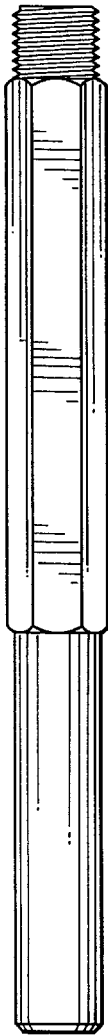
is a side elevational view of the magnetic tool for removing metal particles from gas mains, the five other side elevational views being identical thereto; FIG. 2 is a top plan view thereof; and, FIG. 3 is a bottom plan view thereof.
